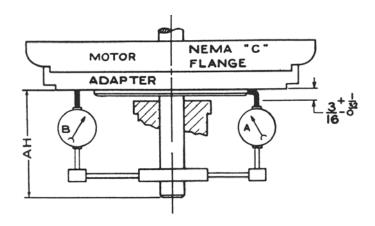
60 Series Hazardous Location Brake - Adapter Installation
